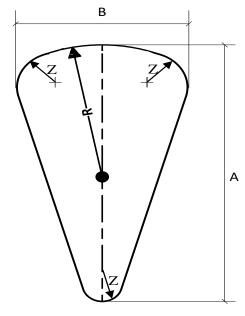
TRAPEZOIDAL SECTION OF STANDARD CRANE HOOK
